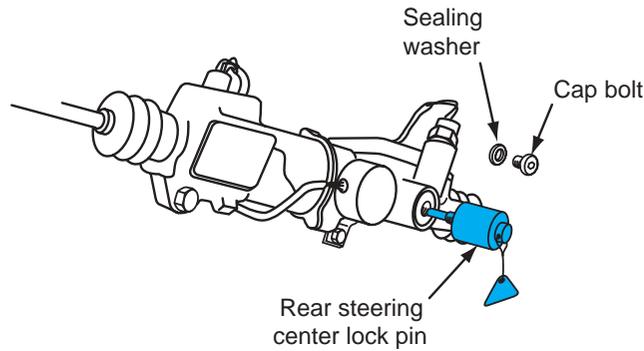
Removing the rear cap bolt and sealing washer, and installing the rear steering center lock pin.
